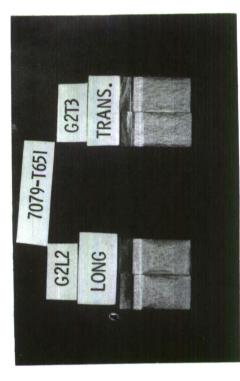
Fracture Surfaces of Representative Specimens
